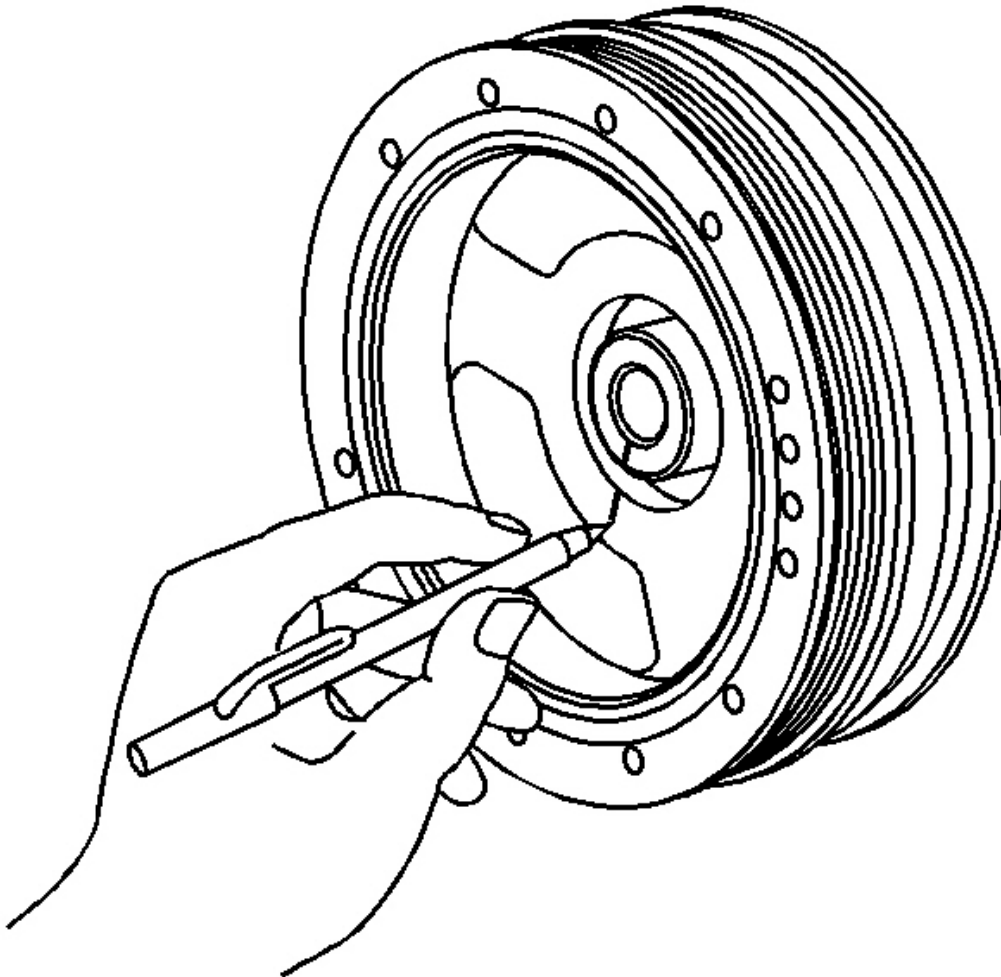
Mark Crankshaft Balancer & End Of Crankshaft
